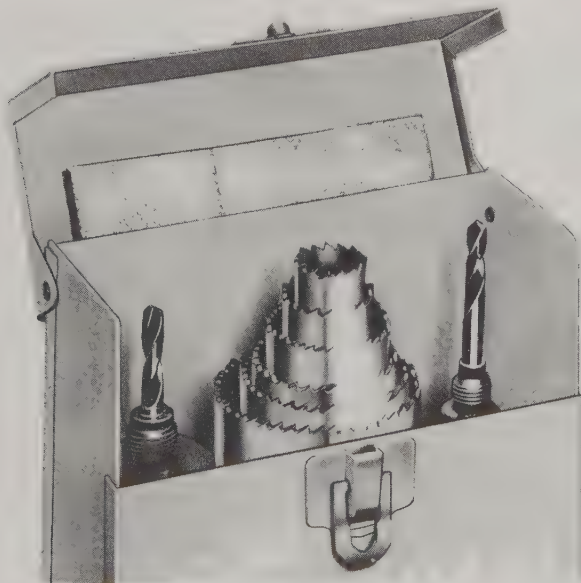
Hole-saw sets include one or more arbors and a range of saw sizes for holes of different diameters. (Milwaukee Electric Tool Corp.)
